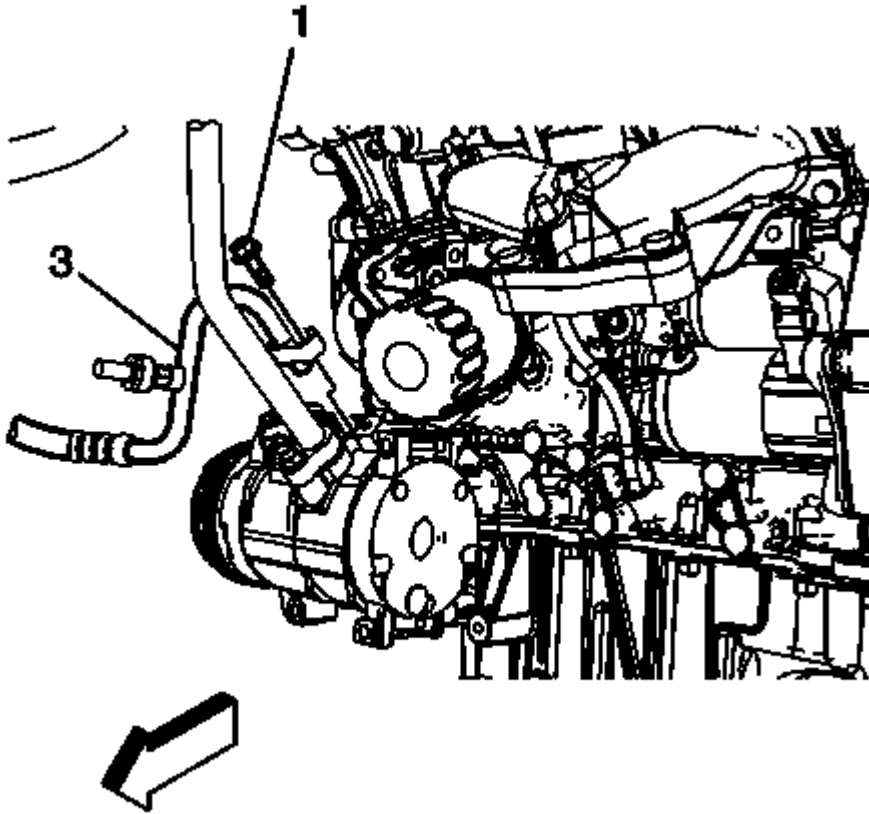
Identifying A/C Compressor Discharge Line & Bolt
